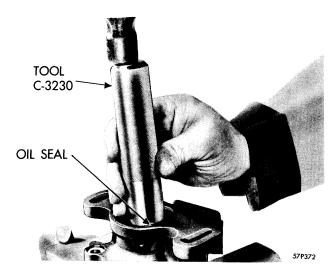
Installing Pump Shaft Oil Seal with Tool C-3230
